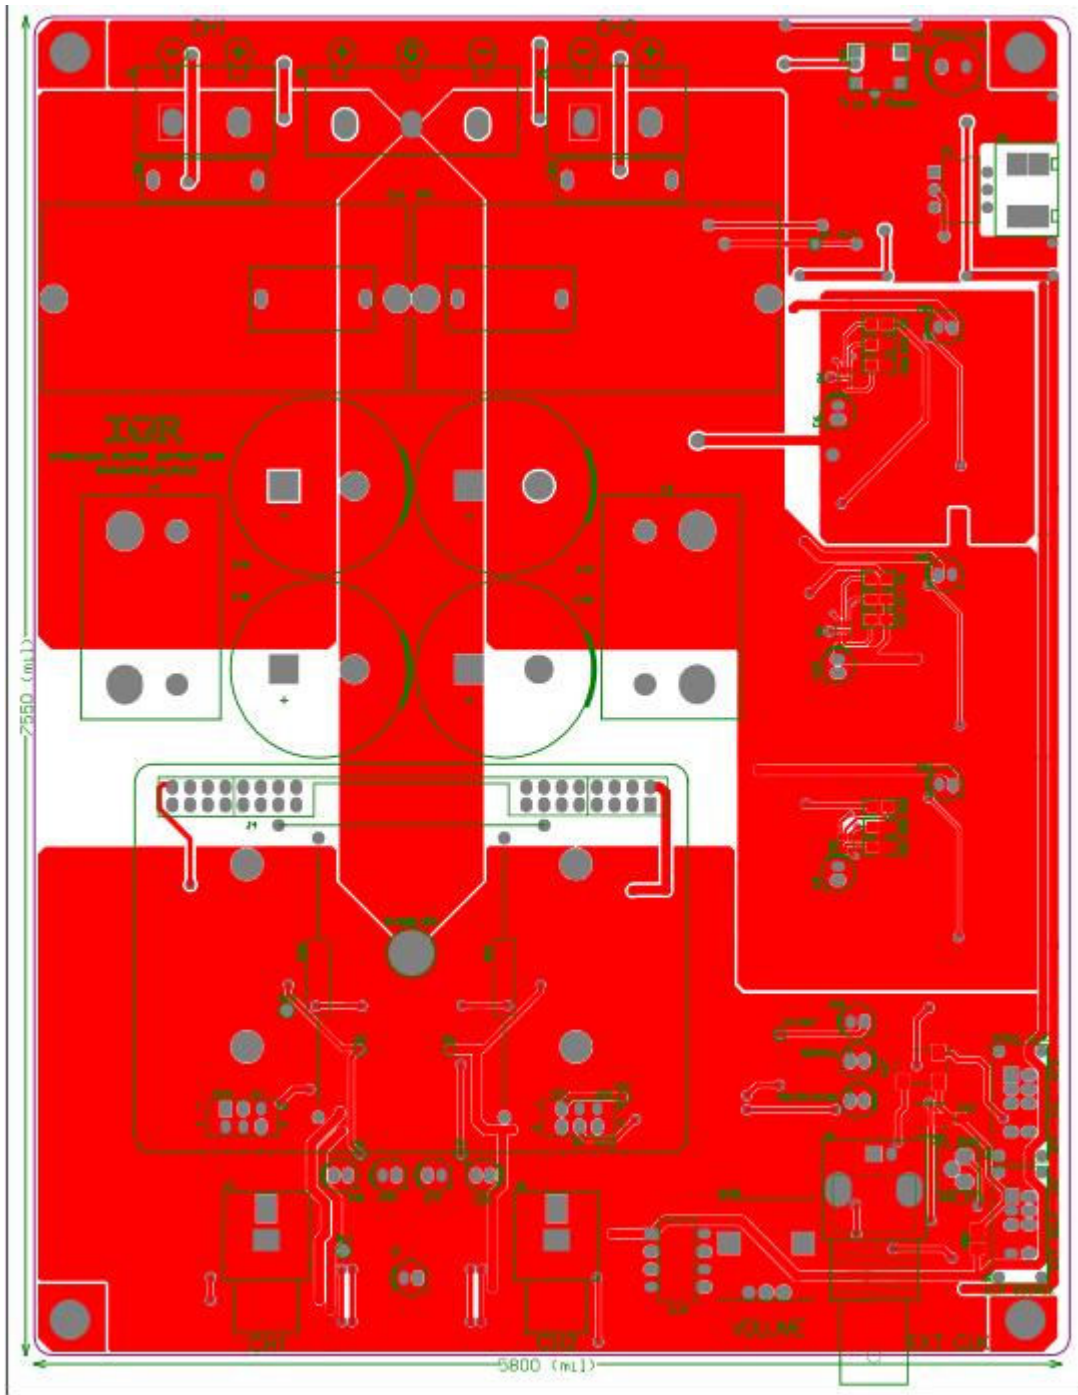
IRAUDAMP6 Mother board PCB Top Overlay (Top View)
